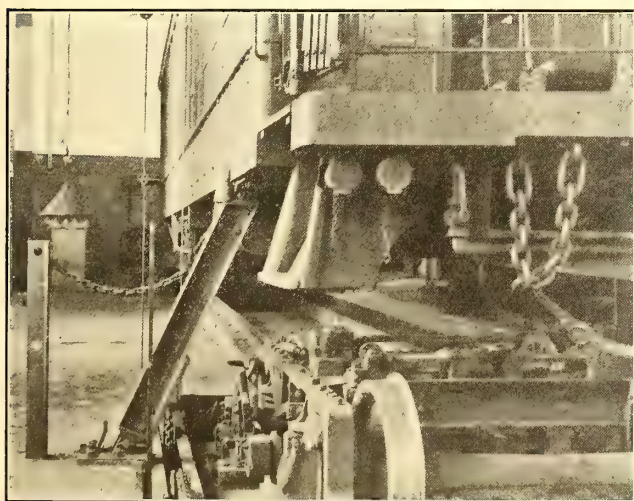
STEEL SUPPORTS HOLDING UP CAR AS TRUCK IS LOWERED
